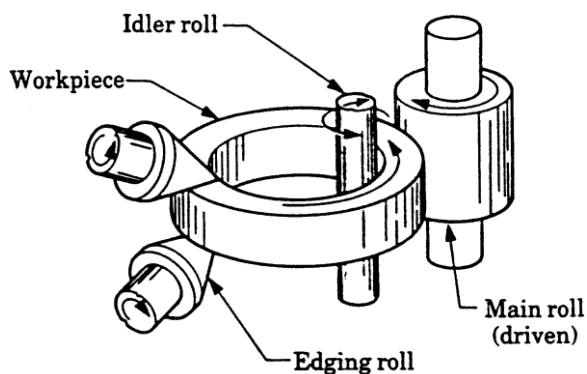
Schematic of a radial-axial ring rolling mill [5]
